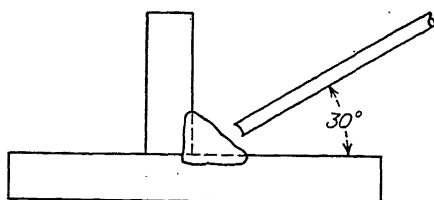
Position of electrode on single-pass flat fillet weld.
